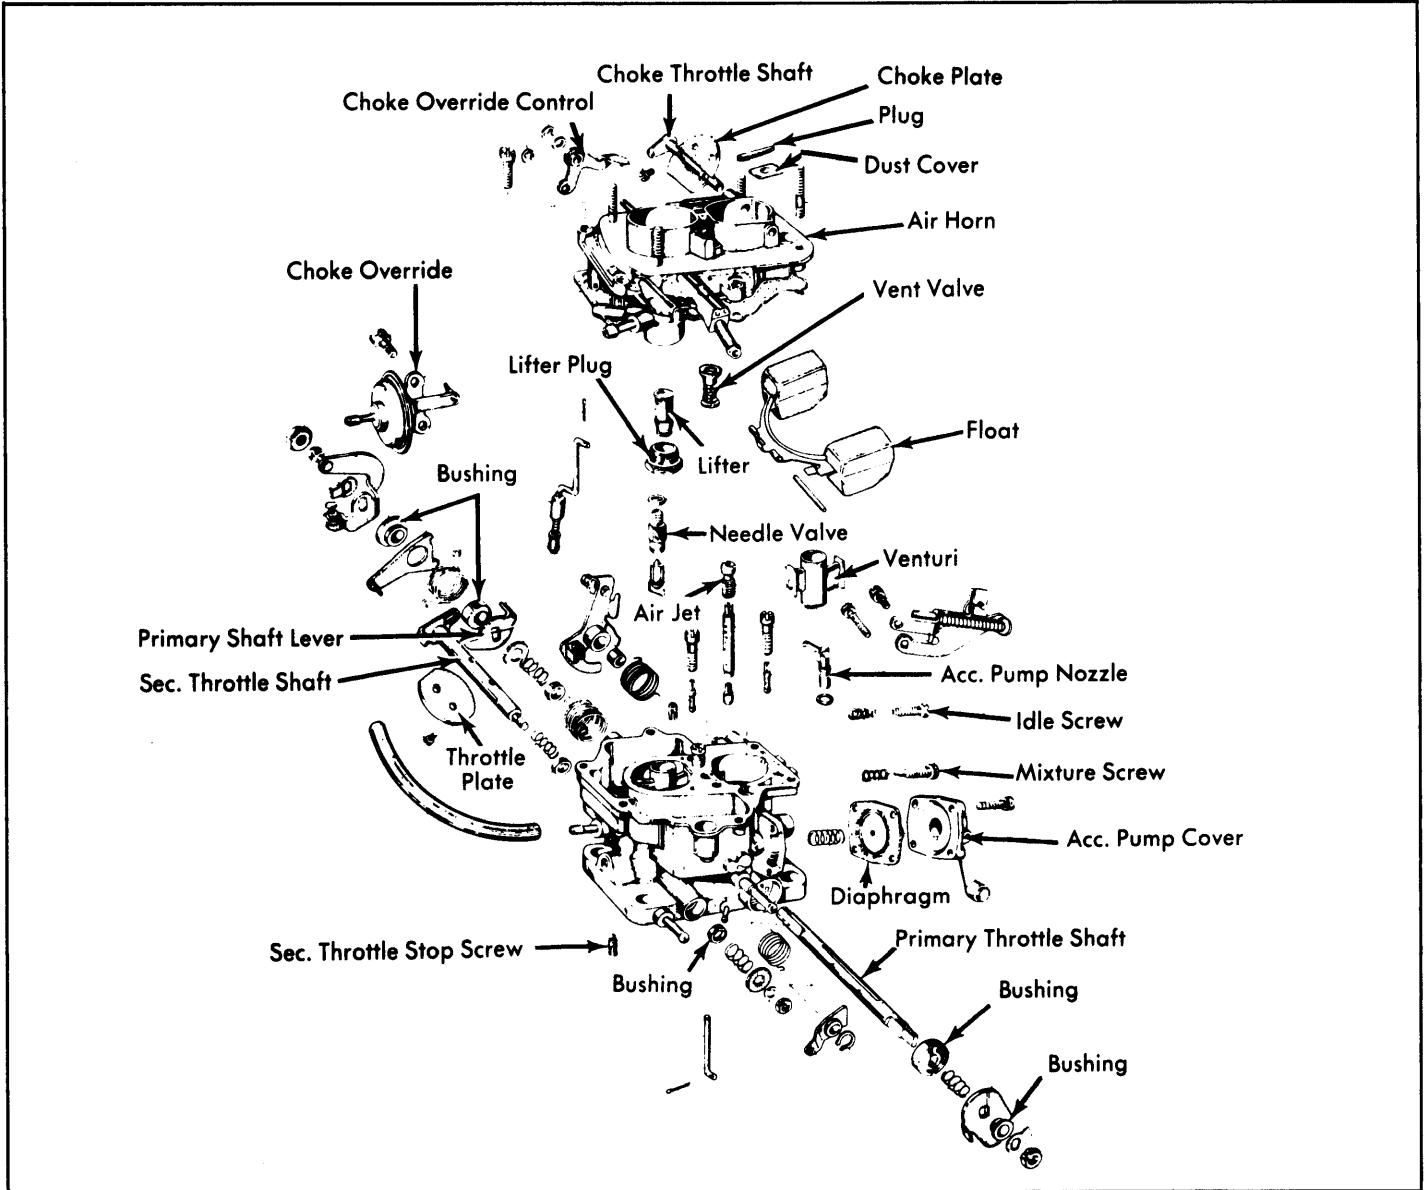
Exploded View Of Weber DATRA 2-Barrel Carburetor
